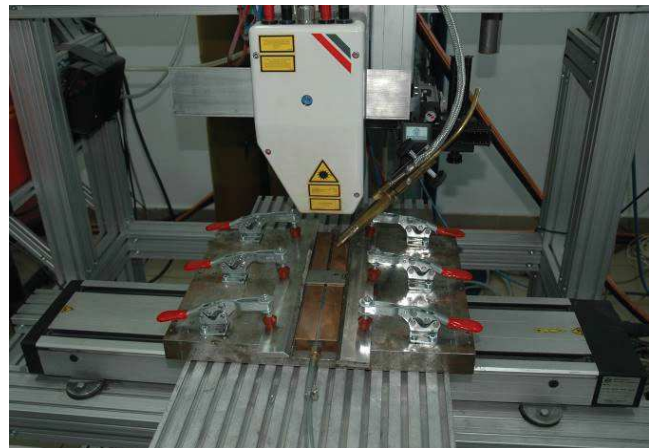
A view of the experimental stand for laser welding tests of 2.0 mm thick AISI 304 steel sheets using a high power diode laser ROFIN DL 020
